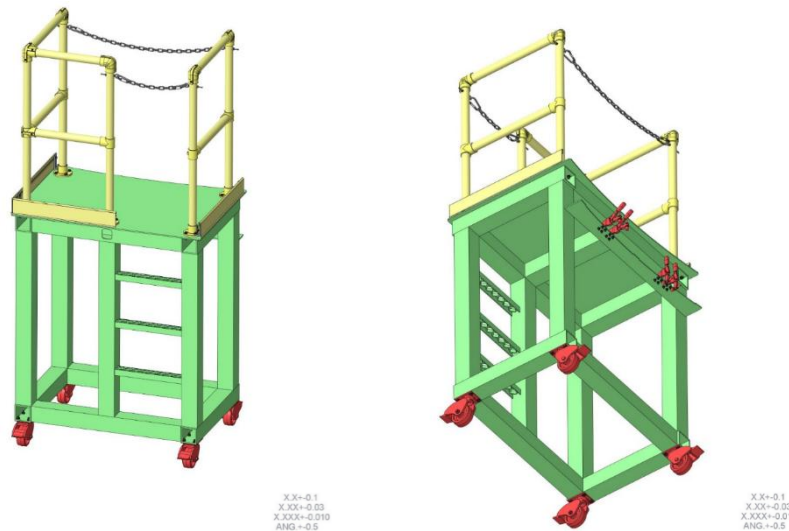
The final draft of the CAD assembly model for the Outer Platform.
